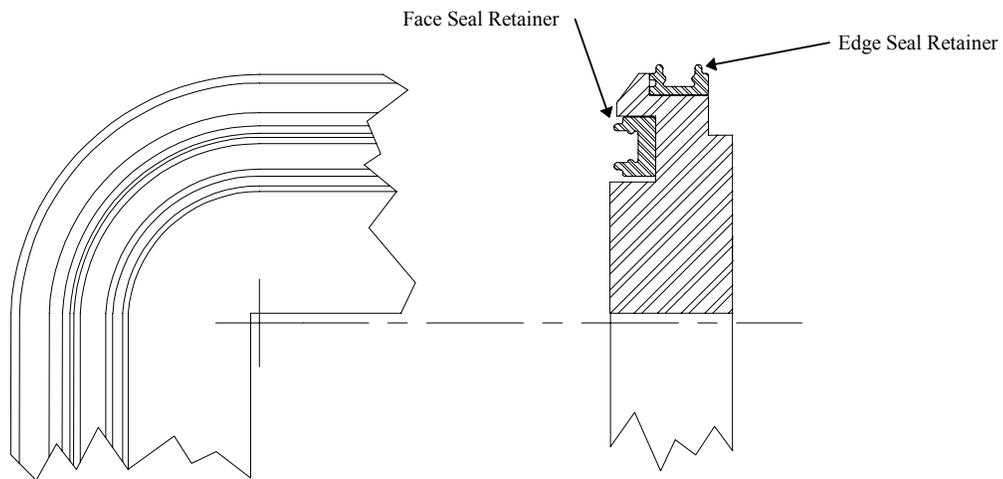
A Cross-Section of the Door Seal EQ Test Rig Showing Edge and Face-Sealing Configurations
